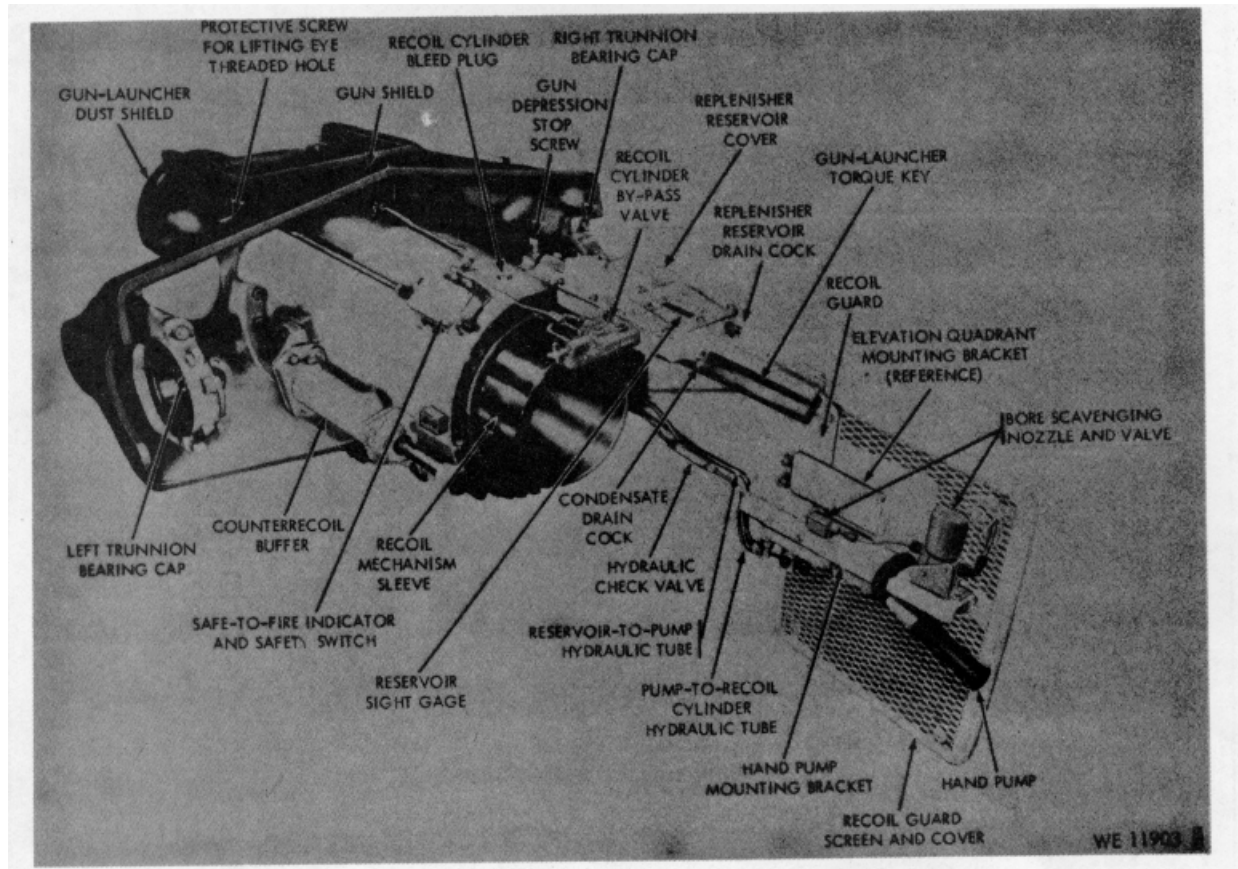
Gun mount assembly for gun-launcher - locational reference.
